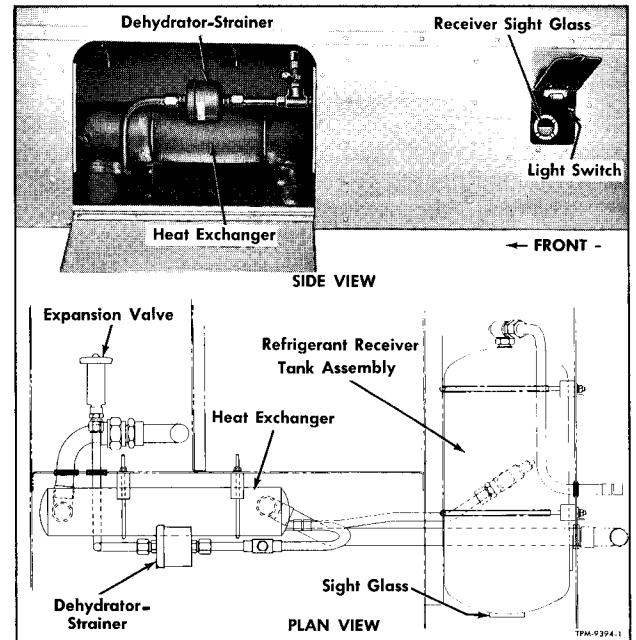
Dehydrator-Strainer, Heat Exchanger, Charging Valve, and Receiver Tank Sight Glass Location
